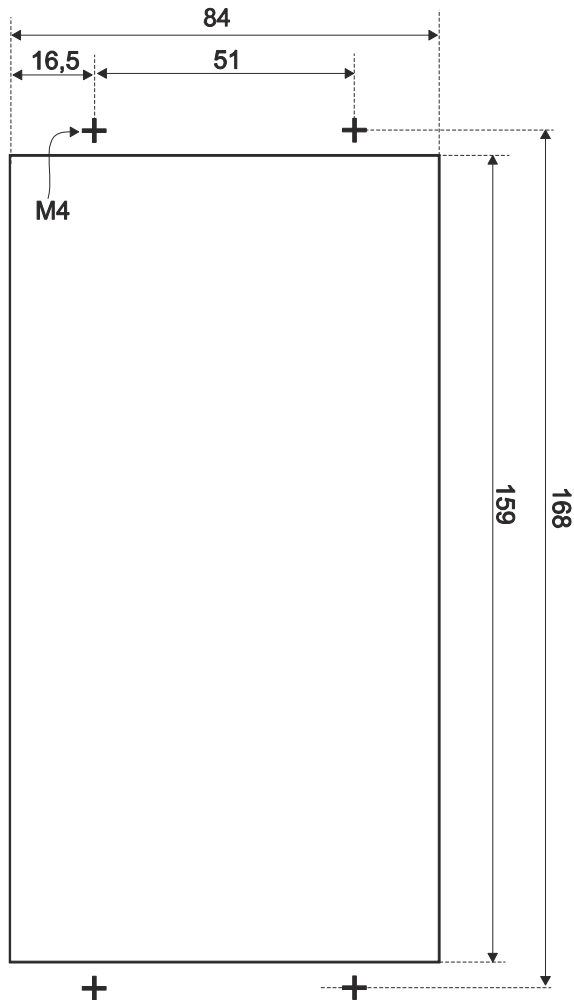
AQ110P cut out for panel mounting, scaling in millimeter.
